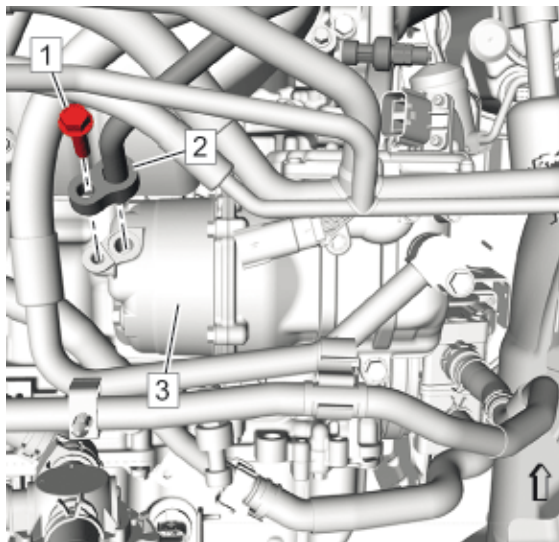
Air Conditioning Compressor, Condenser Hose And Bolt
